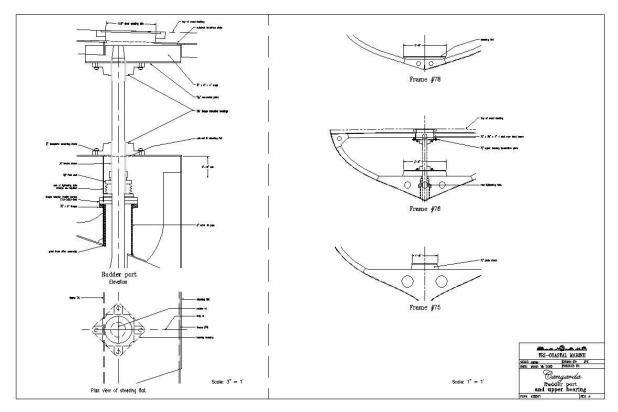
New Tri-Coastal Marine Drawing of the Rudder Quadrant, Rudder Tube and Welded Support Structure
